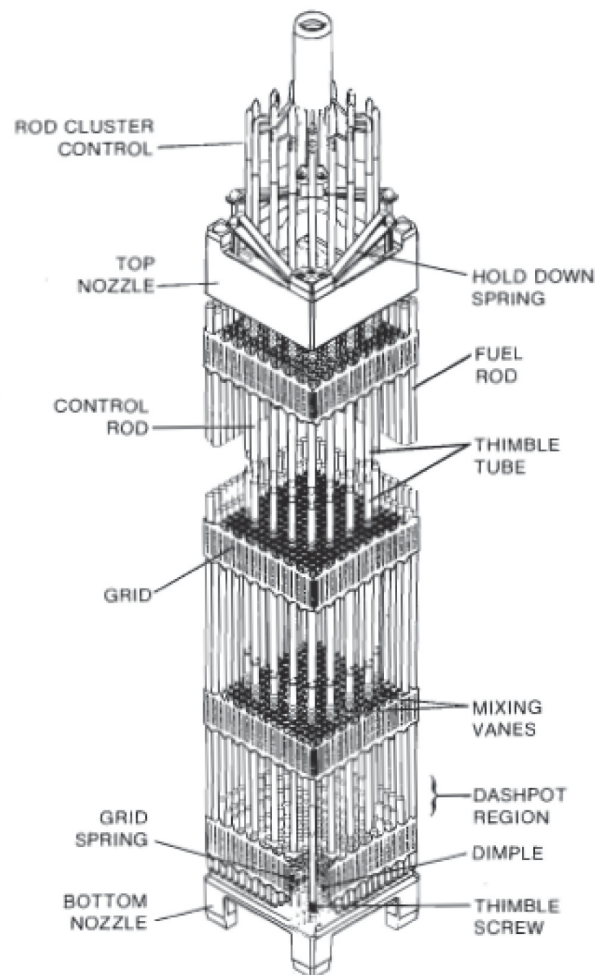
Cutaway of 17x17 Optimized Fuel Assembly with RCC
